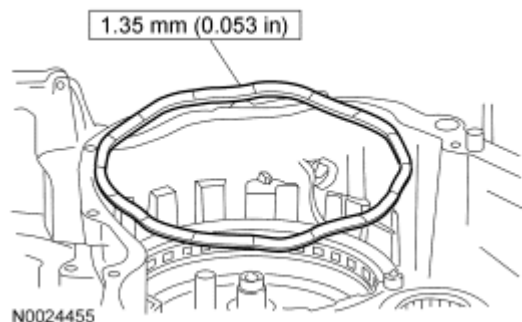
Thick Low/Reverse Clutch Wave Spring
